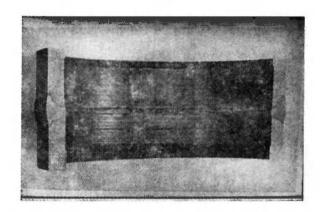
Weld in 6" dia. schedule 80 ASTM type A-106 pipe
